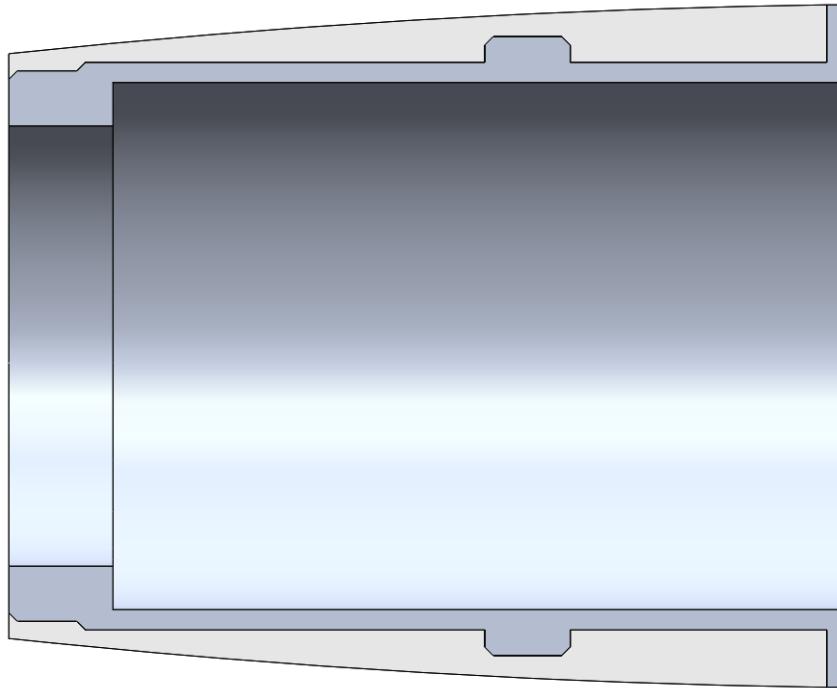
Cross Section of SolidWorks Model of Aluminum Sock and PETG Boot Tail Cone.
